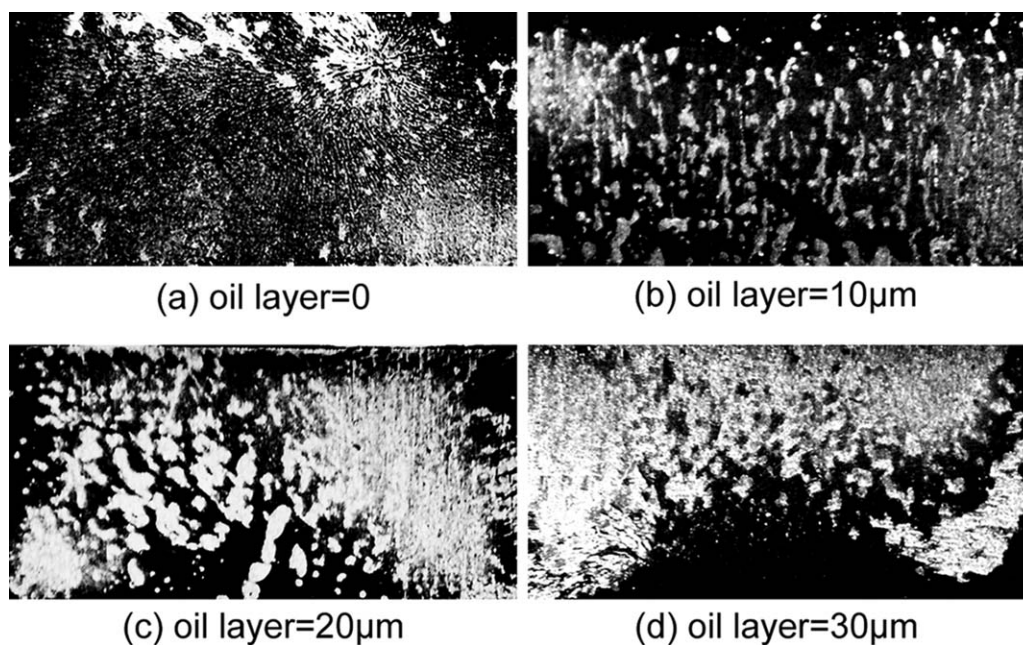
Fracture surfaces with different oil layer thicknesses.
